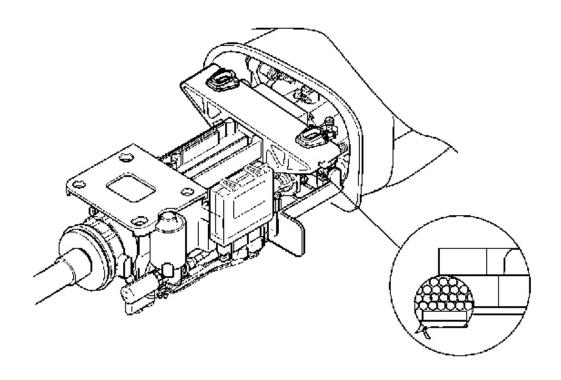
Removing/Installing Plastic Mounted Steering Column Bracket Courtesy of GENERAL MOTORS CORP.
